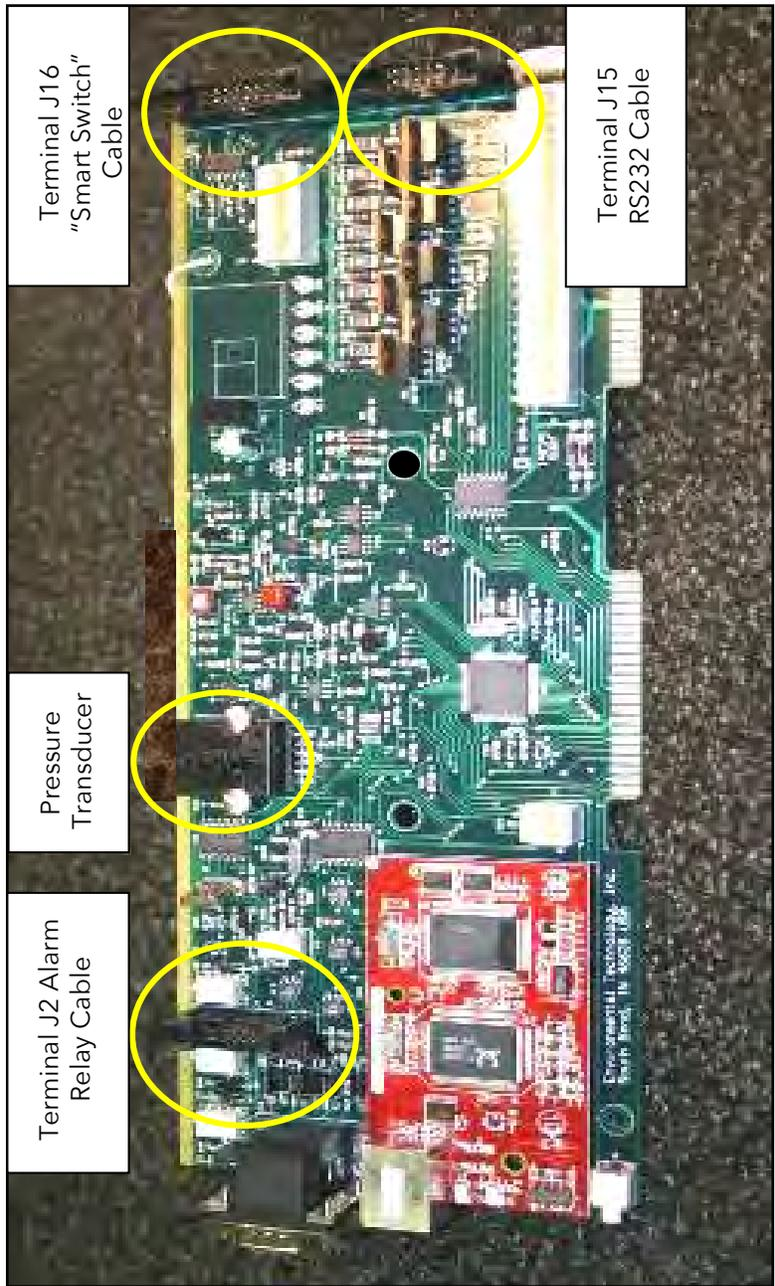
THE ADH NETCOM MAIN CIRCUIT BOARD ASSEMBLY.
